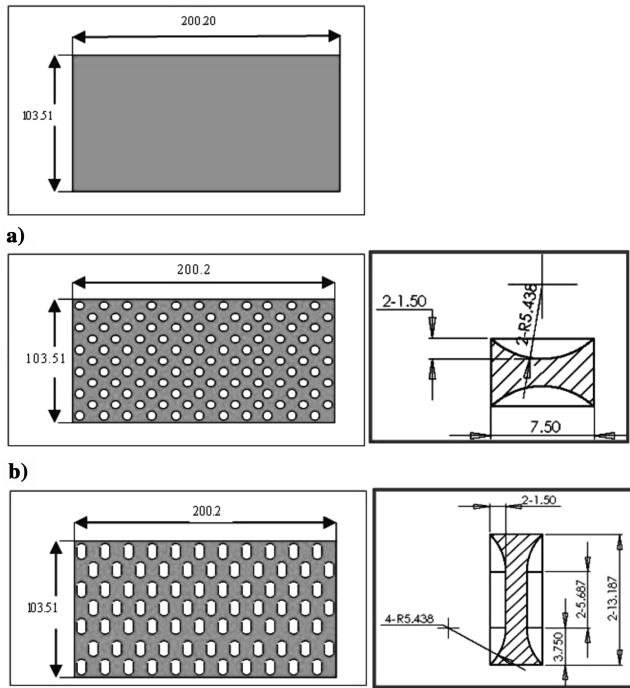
Schematic drawings: a) the entire test surface of the flat copper plate; b) plate with circular dimple dimensions; c) plate with elliptical dimple dimensions. All dimensions are given in mm.
